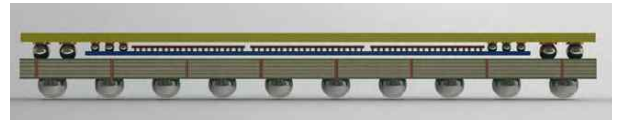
Conceptual illustration of a POSSUM™ assembly. (Courtesy of Amkor Technology)
